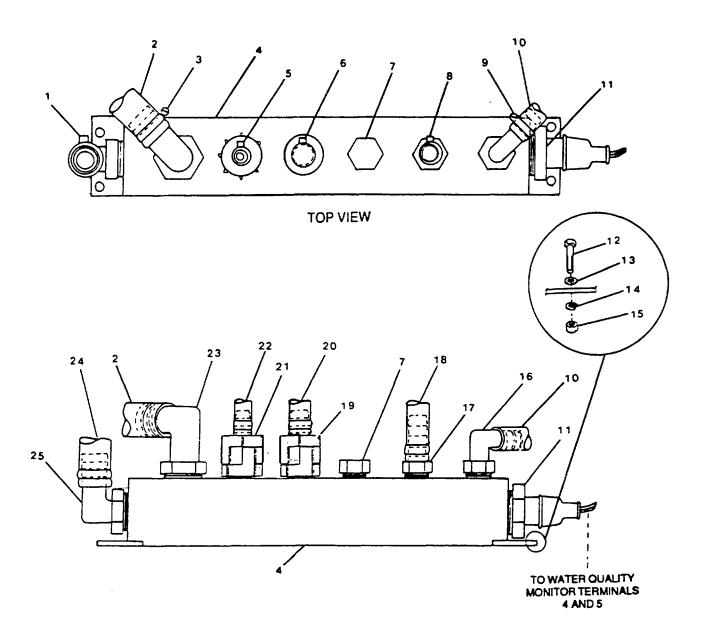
Brine Manifold Assembly (Sheet 2 of 2).
